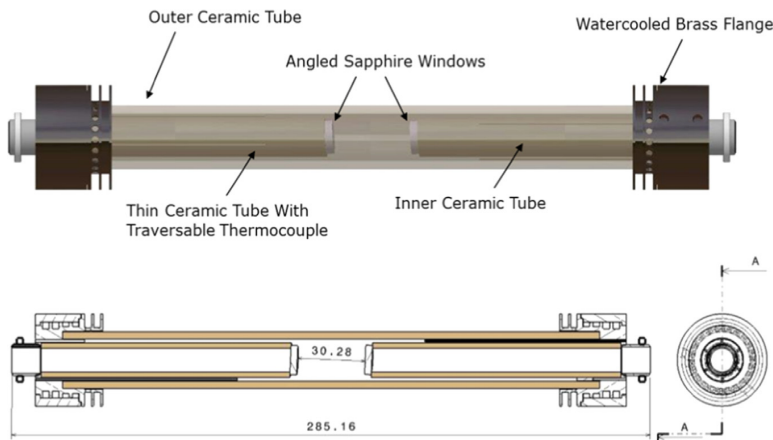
Top: 3-D drawing of HTPGC. Bottom: cross-section sketch of HPTGC including dimensions in mm. The ends of the inner ceramic tubes at the flanges are open.
